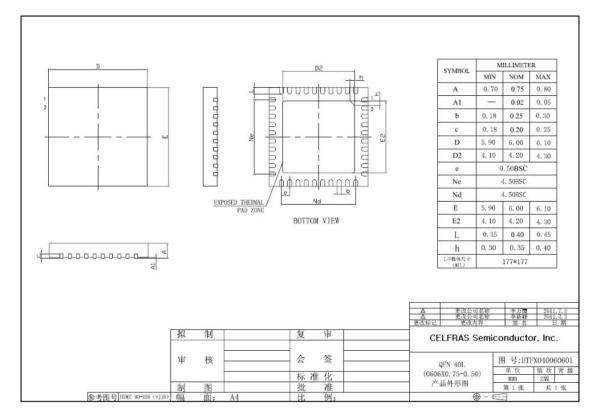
QFN 40-pin Package Outline, 6.0mm x 6.0mm, 0.5mm pitch
